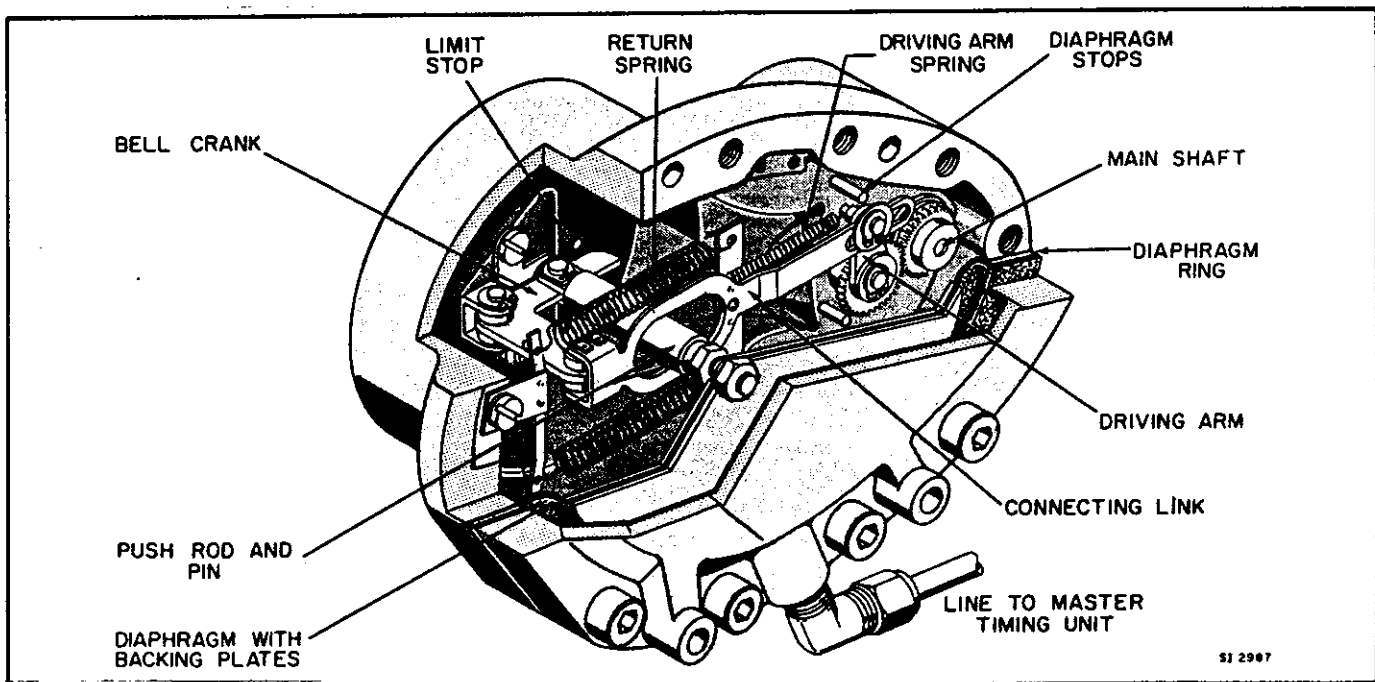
CUTAWAY VIEW OF PNEUMATIC MOTOR OPERATED INTEGRATOR
